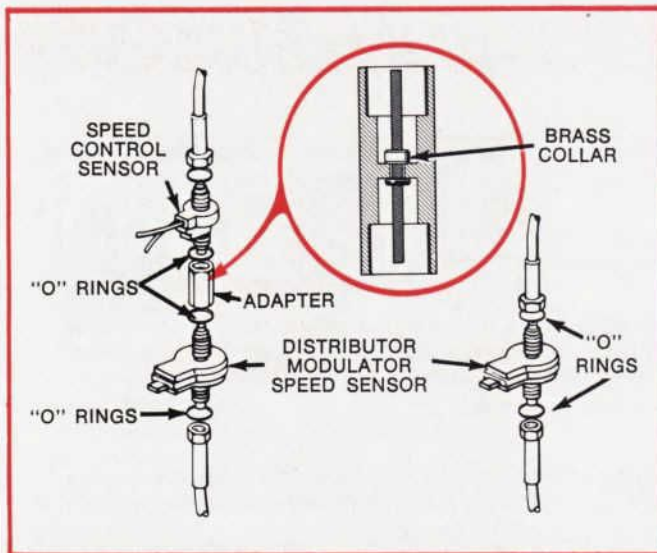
Exploded View of the Speed Control Sensor and its Relationship with the Adapter and Distributor Modulator Speed Sensor. Note Brass Collar and "O" Ring Locations
